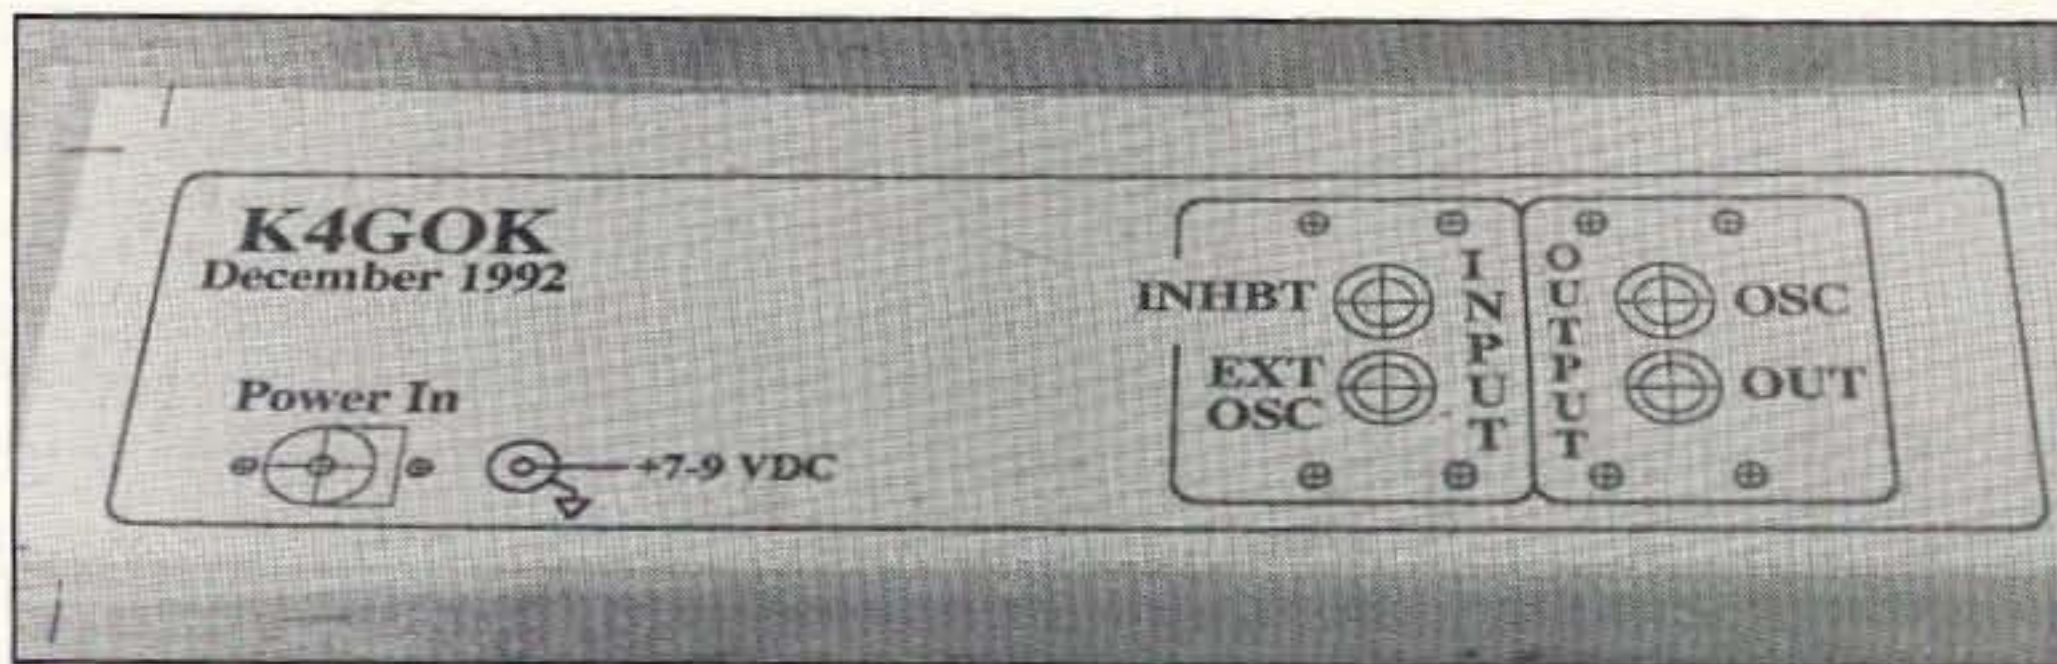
Photo E. A painted panel with the film in place, ready for cutting to shape and drilling.
